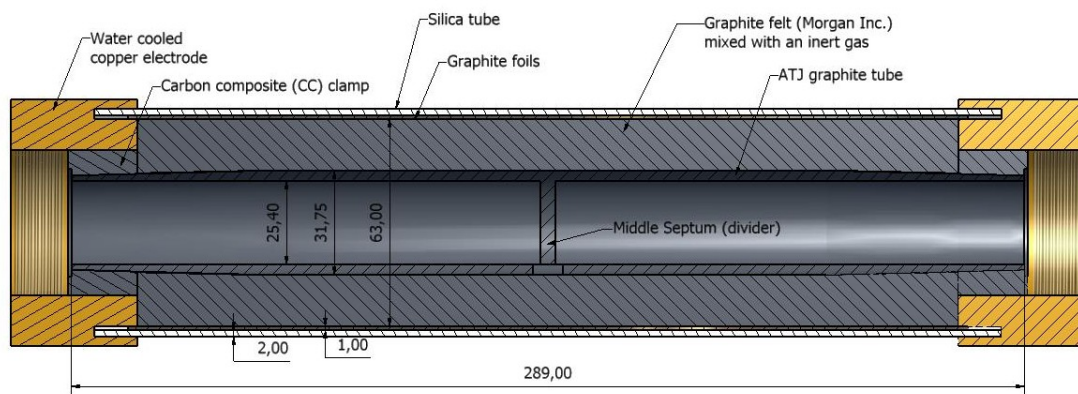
Cross sectional view of the 48kW Thermogage furnace at the NMIA (all dimensions are in mm).
